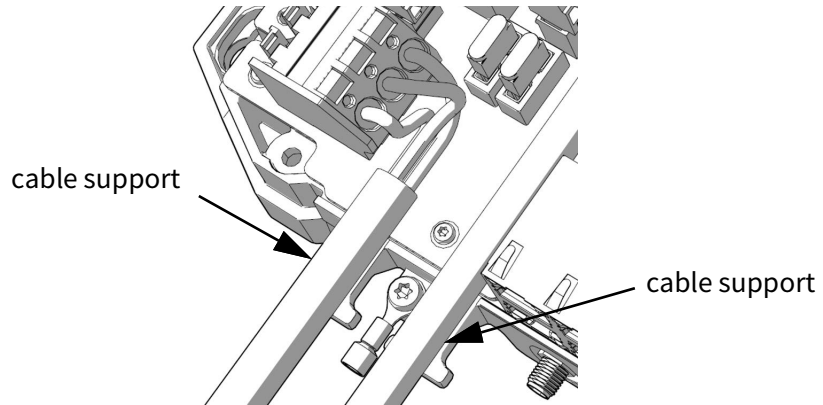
Cable support on EXPLORER Mobile Gateway
